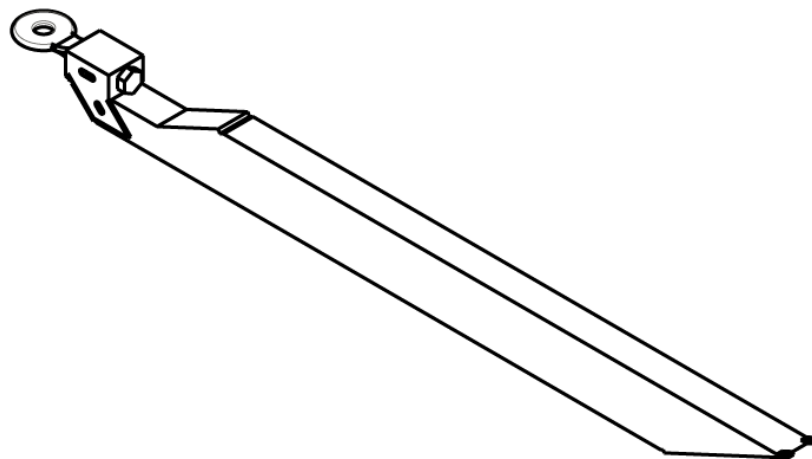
Drawbar assembly, without side supports. Drawbar eye: VBG 15-06, Drawbar: Parator.
